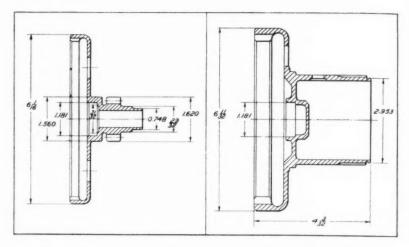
(Left) Cross-section of Gear for Aircraft Controllablepitch Propellers. Fig. 2. (Right) Cross-section of Another Gear Used in Aircraft Controllable-pitch Propeller Assemblies
